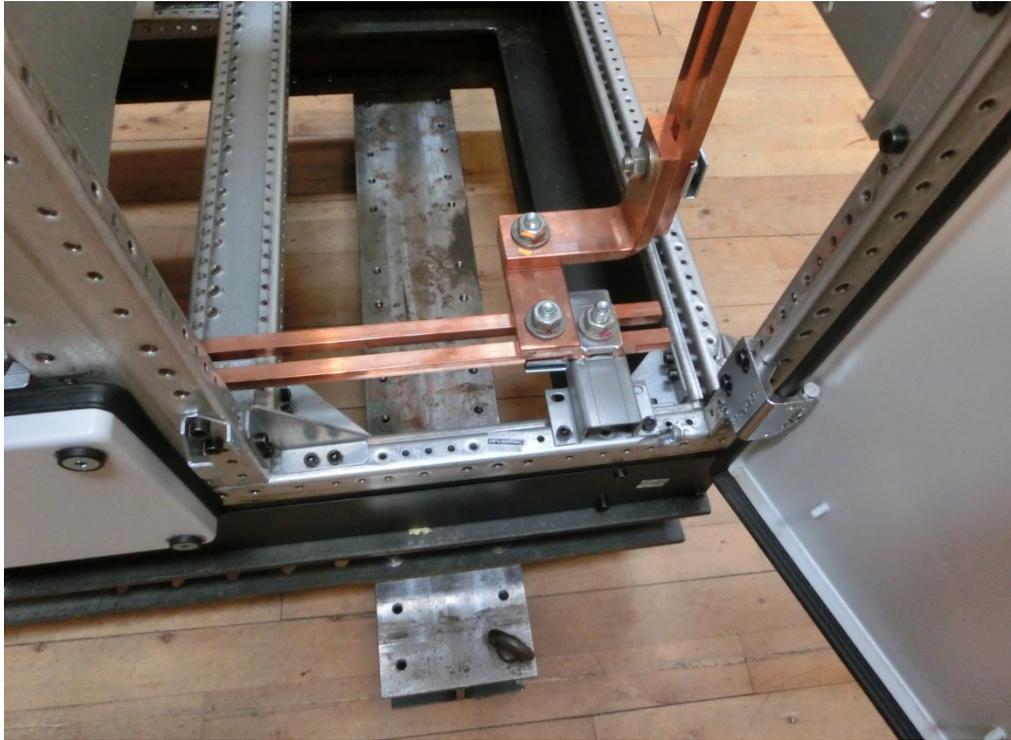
Visual Inspection: Large copper bars and mounting OK.
